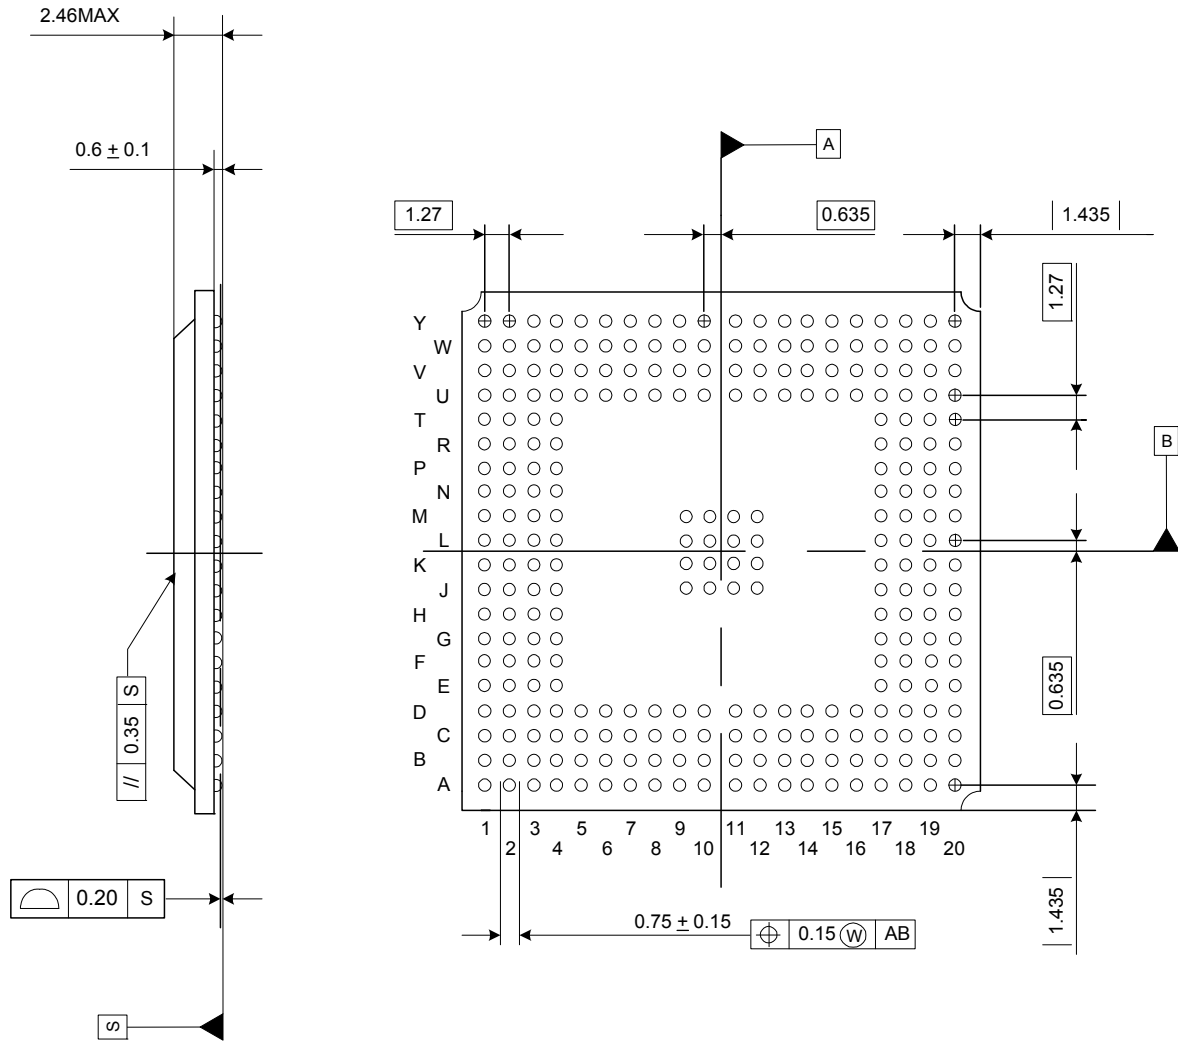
shows the layout of the NS9360, for use in setting up the board.
